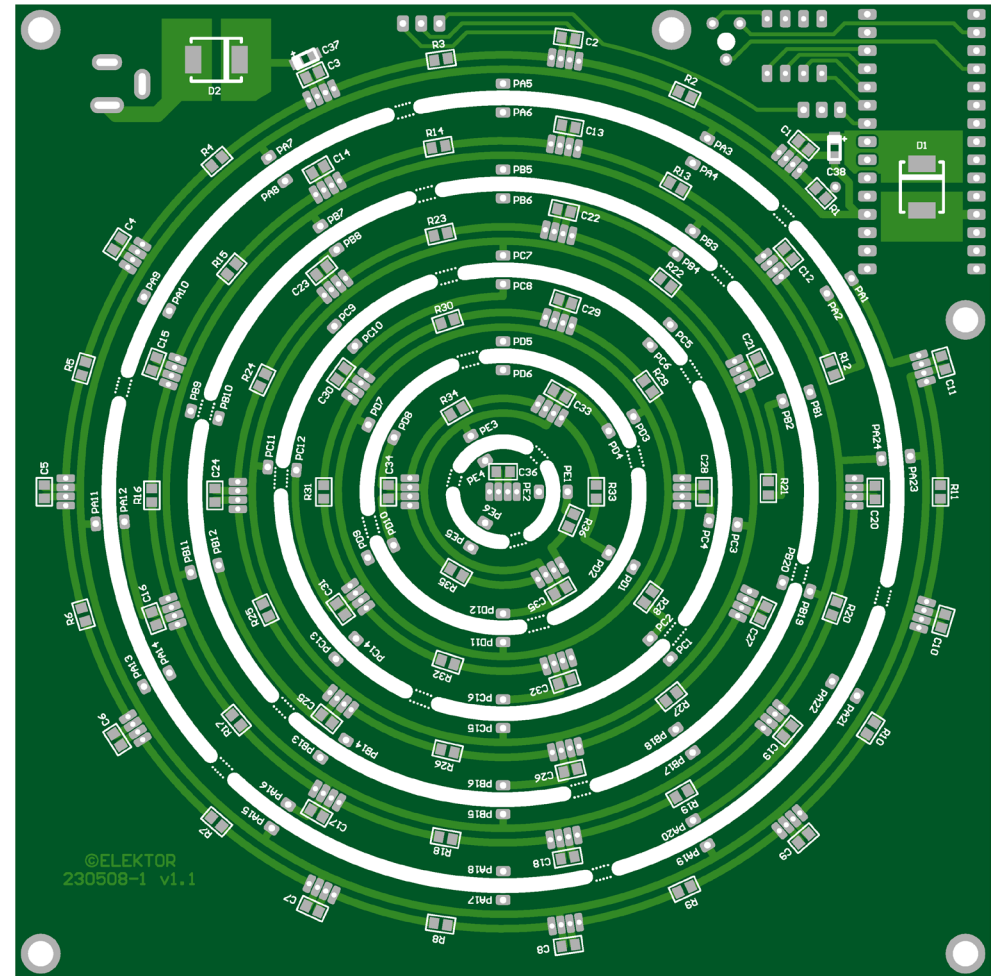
Bottom-side overlay of PCB for Circular Christmas Tree 2023. PCB no. 230508-1 v1.1.
